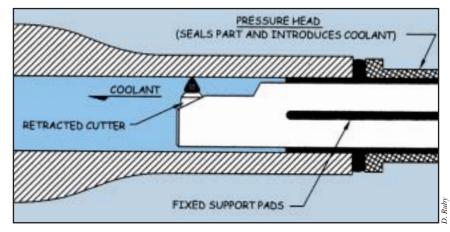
Supported by its fixed support pads, a bottle-boring tool with its cutter retracted enters a through-bore workpiece. Coolant is forced through the workpiece by the pressure head and is exhausted out the opposite end.
